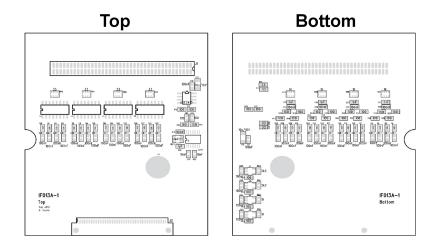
Driver board placement plan, left: top layer and right: bottom layer.
